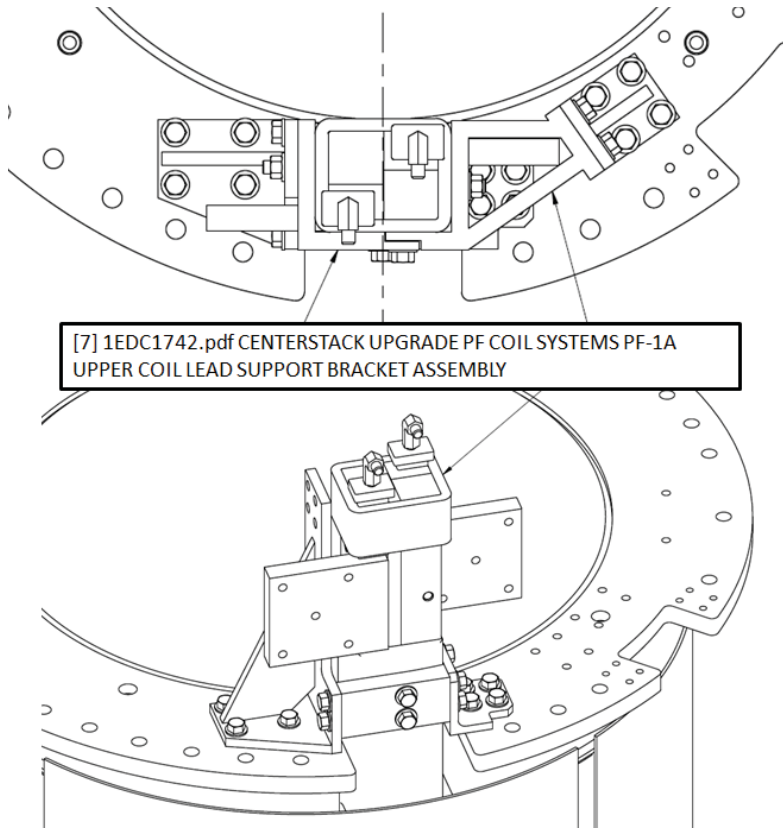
PF1a Upper and Lower Terminal Tower Assembly and Partial Assembly
